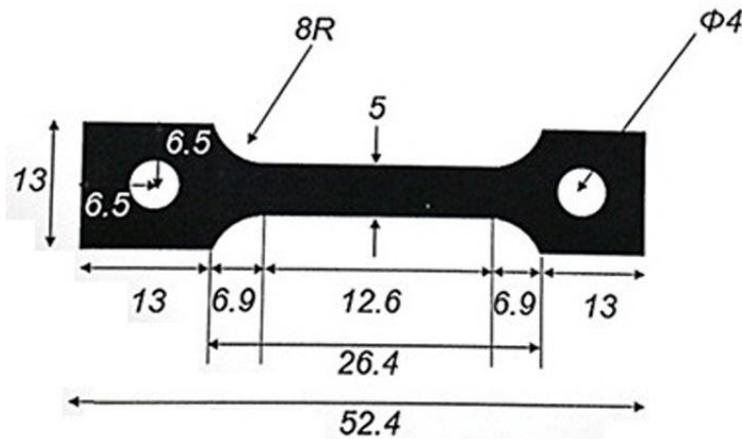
Engineering drawing of sub-sized uniaxial tensile specimen (all dimensions are in mm).
